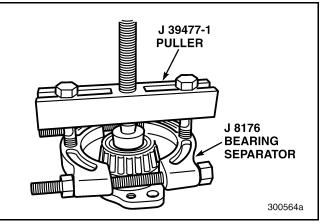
Removing Bearing Cone from Front Countershaft Front Bearing Cover
